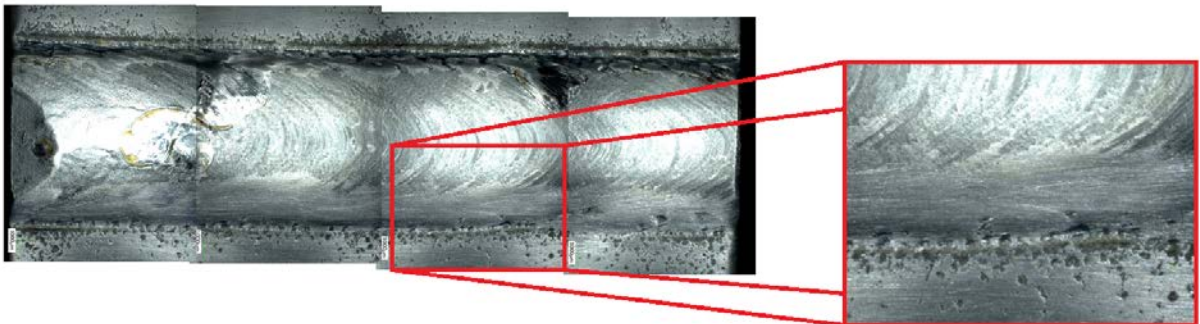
Evidence of the presence of secondary notches at the weld toe for a double-V butt weld made of S355NL. The magnification shows the major role played by the surface roughness of the base plate in the proximity of the weld toe.
